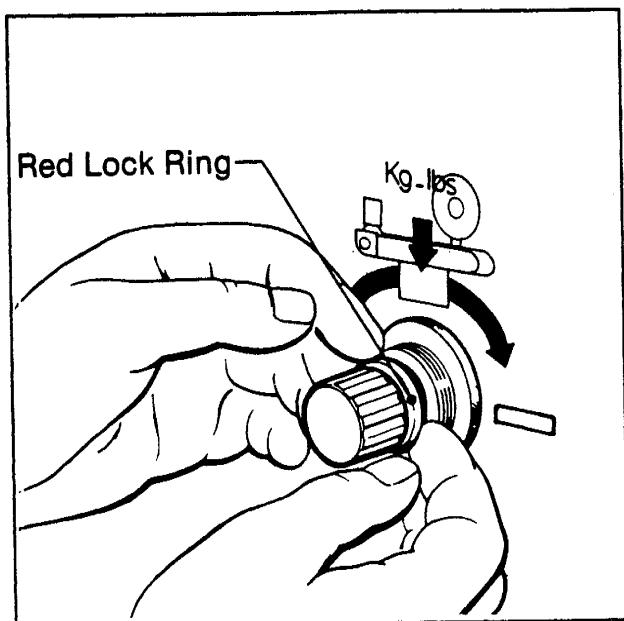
Top Head Pneumatic Regulator Locking Ring
